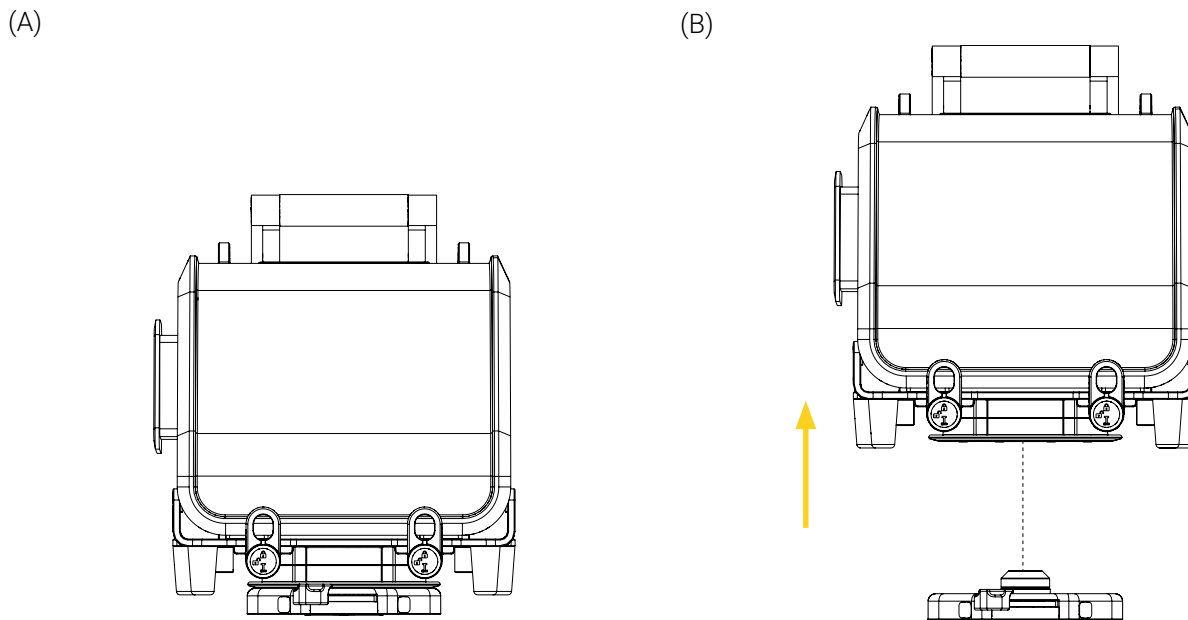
Removing the mounting bracket from the Universal Mounting Base
